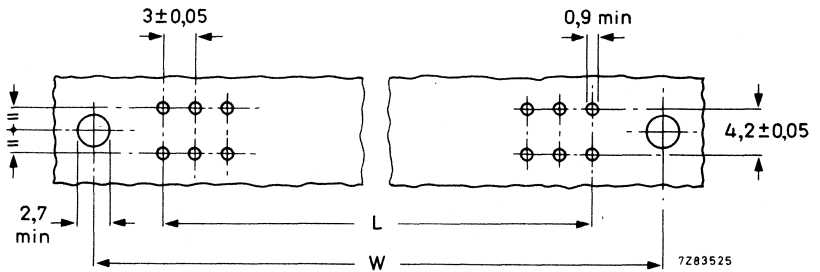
Hole pattern for a male part with straight dip-solder pins. See Table 6 for dimensions L and W.
